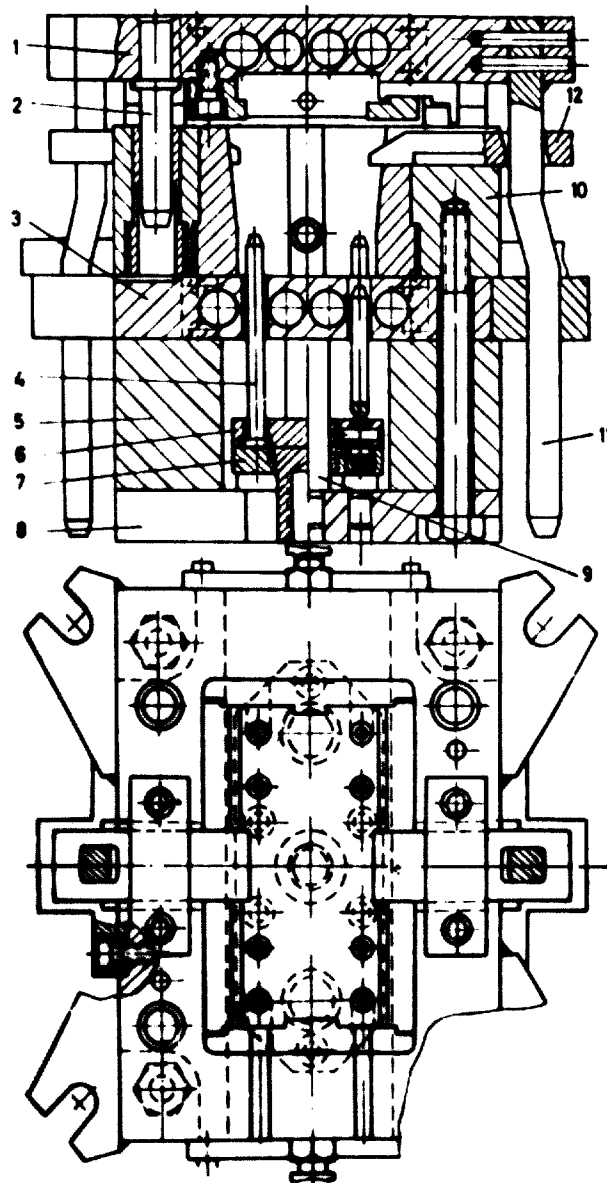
Group-adaptable tapered and split unit for casting the parts shown in figure 27
